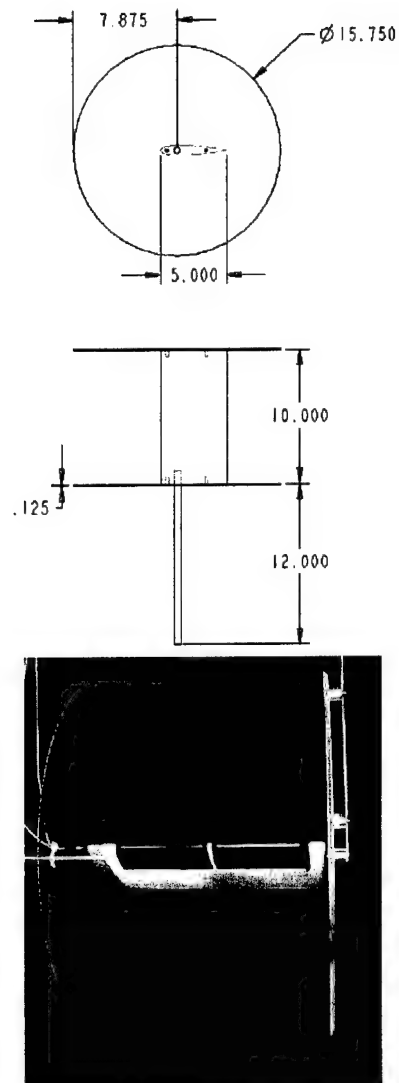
Schematic drawing and photograph of the NACA 0015 airfoil with circular end plates. Dimensions are in inches.
